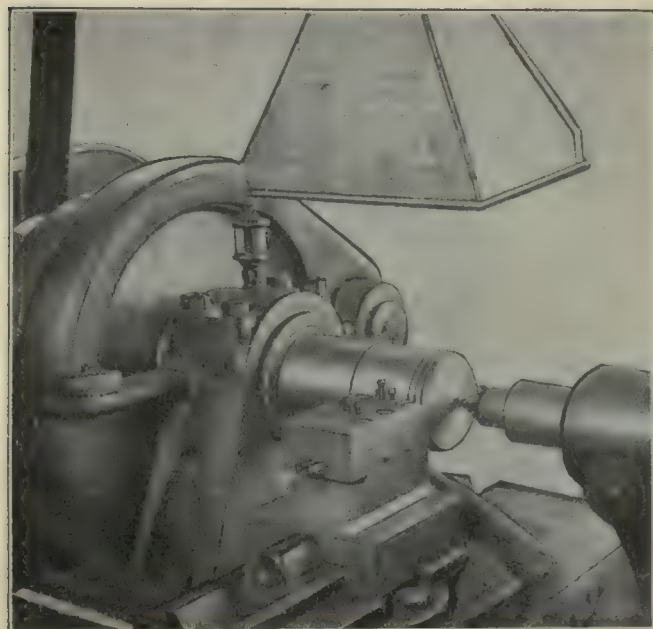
FINISH-TURNING PISTON-RING GROOVES
